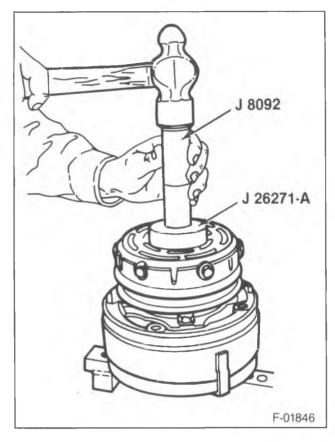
Installing the Rotor and Bearing Assembly — V-Groove Type
